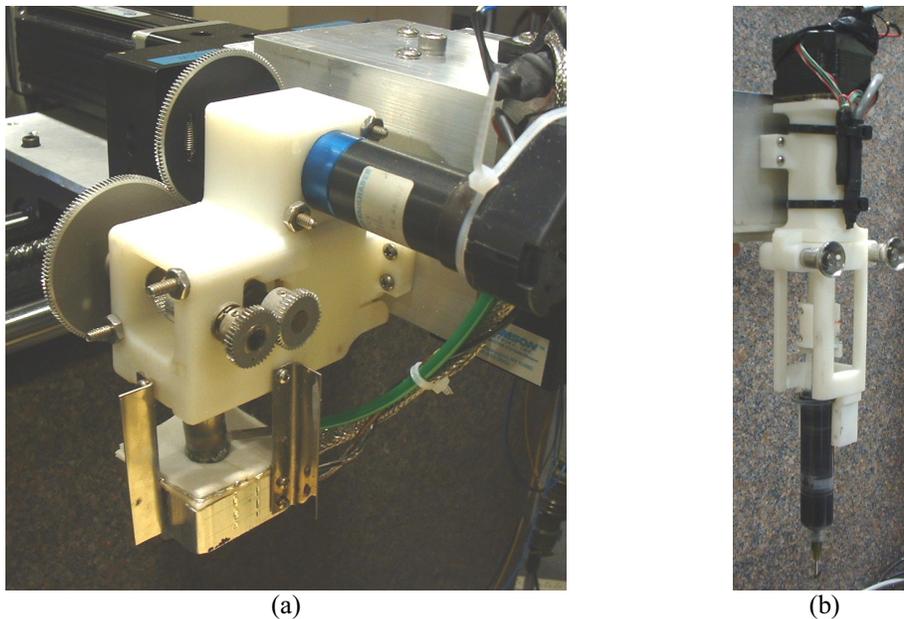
Extrusion tools constructed: (a) wire-fed extruder, and (b) syringe tool
